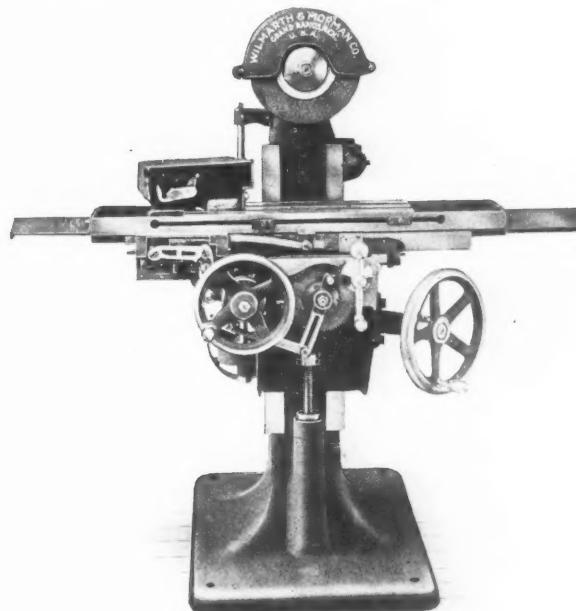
Surface Grinder with Automatic Feed Box removed to show Mechanism.
